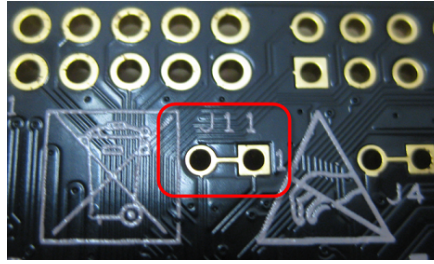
Step 1: Detection of solder jumper - SJ11;
